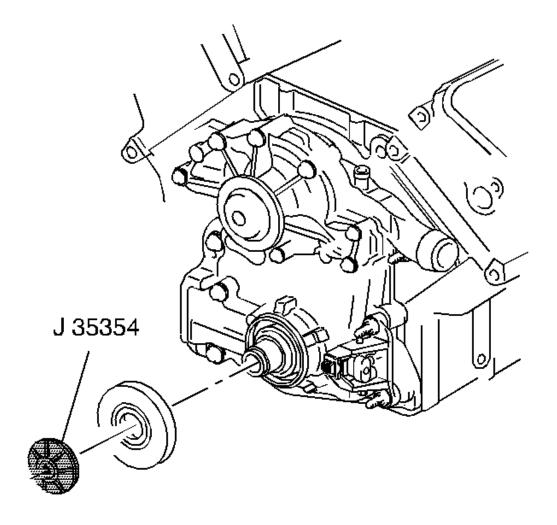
Installing Crankshaft Front Oil Seal Courtesy of GENERAL MOTORS CORP.
